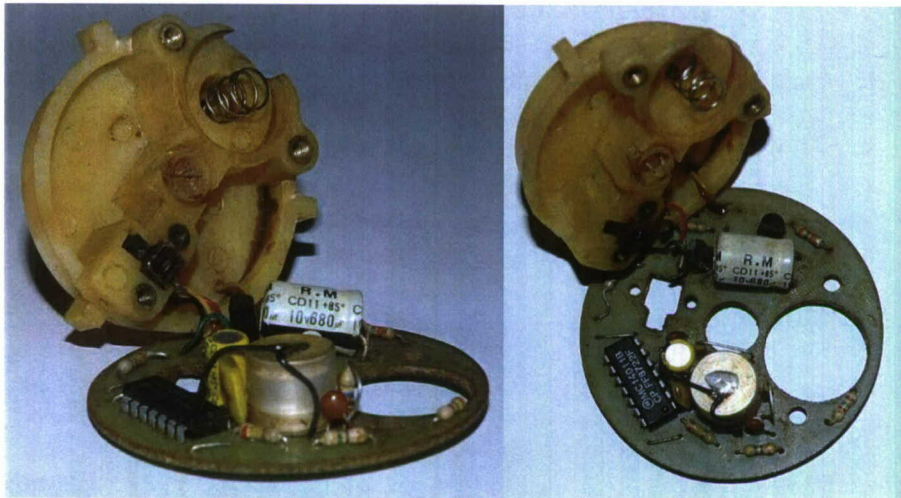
Type72b PCB component side, plastic cap removed. The tilt switch is the component with the two black wires soldered on the top. The electrolytic capacitor (10V680µF) is C1; the DET CAP.
